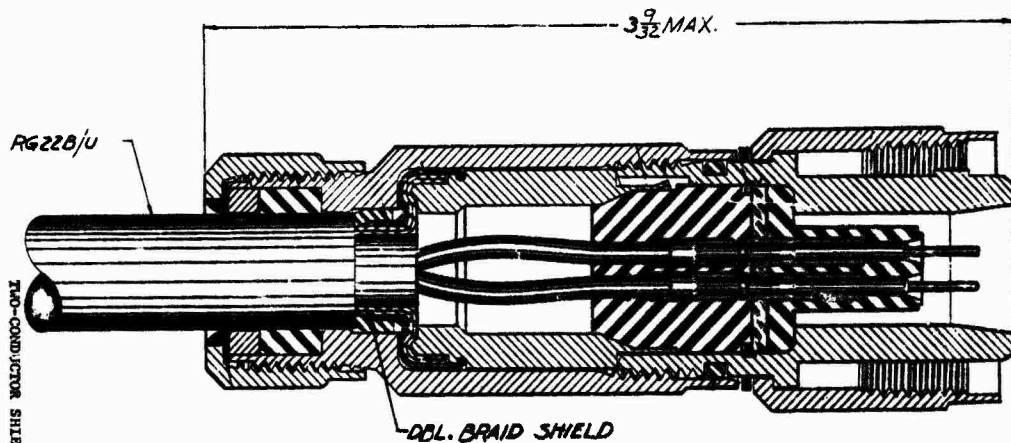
TWO-CONDUCTOR SHIELDED CABLE PLUG CONNECTOR ASSEMBLY
